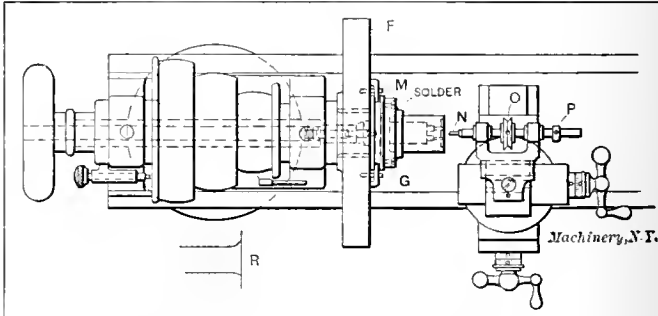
Finishing the Hole in a Bench Lathe with a Diamond Lap
